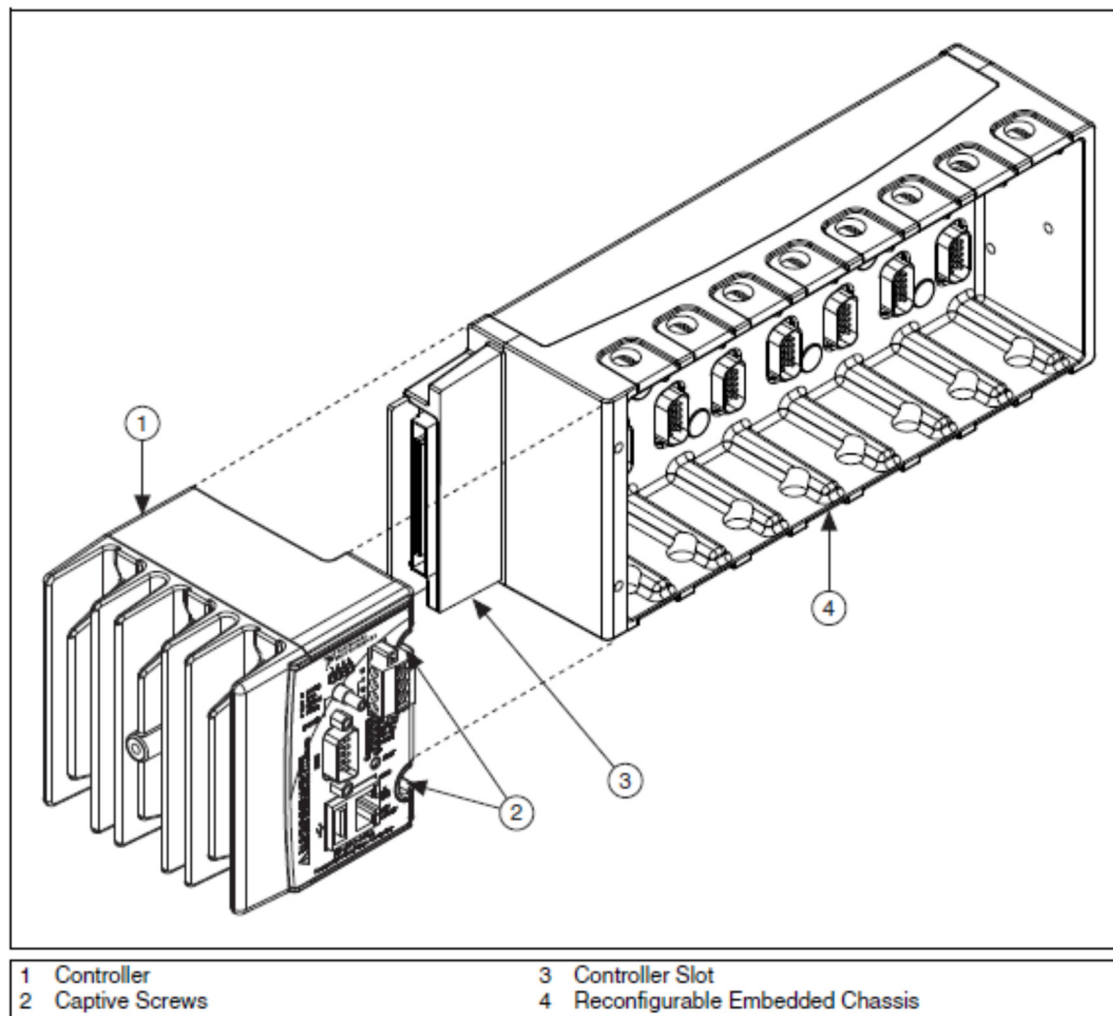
Installing the Controller on the Chassis (Eight-Slot Chassis Shown)
